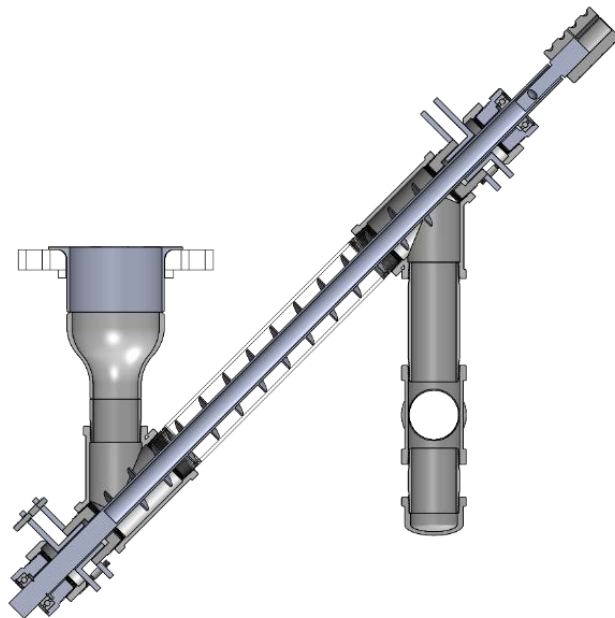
Screw conveyor consisting of a helical screw blade coiled around a shaft within a tube. As the shaft rotates, the screw blade moves the material along the length of the conveyor from bottom end to the upside.
